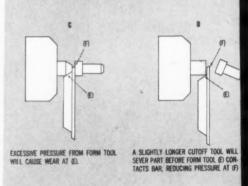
This sketch shows a combination circular cut-off and form tool that will give poor tool life unless modified as shown.
